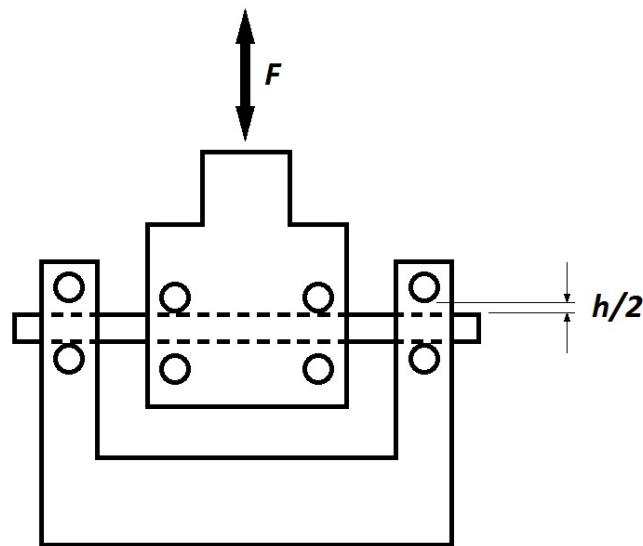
Schematic of fully-reversing four-point bending fatigue fixture.
